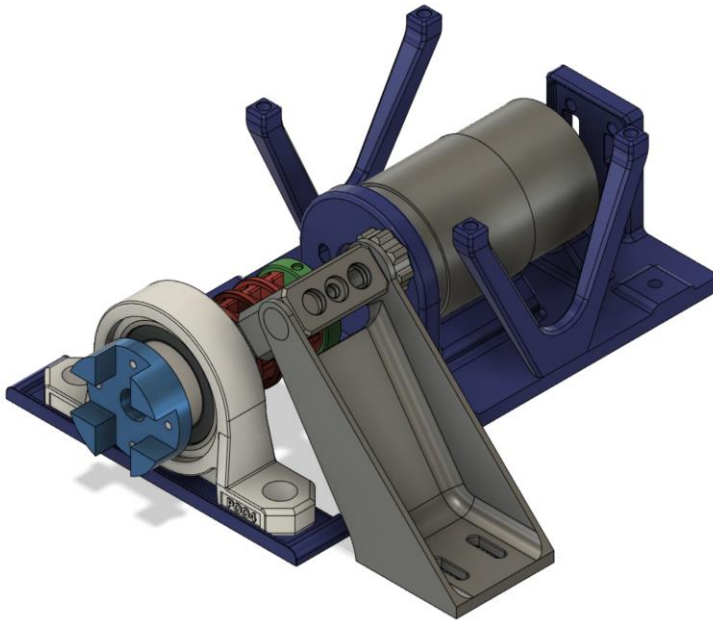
Final assembled design. Only one motor brush holder visible in this rendering; another will be placed on the other side.
